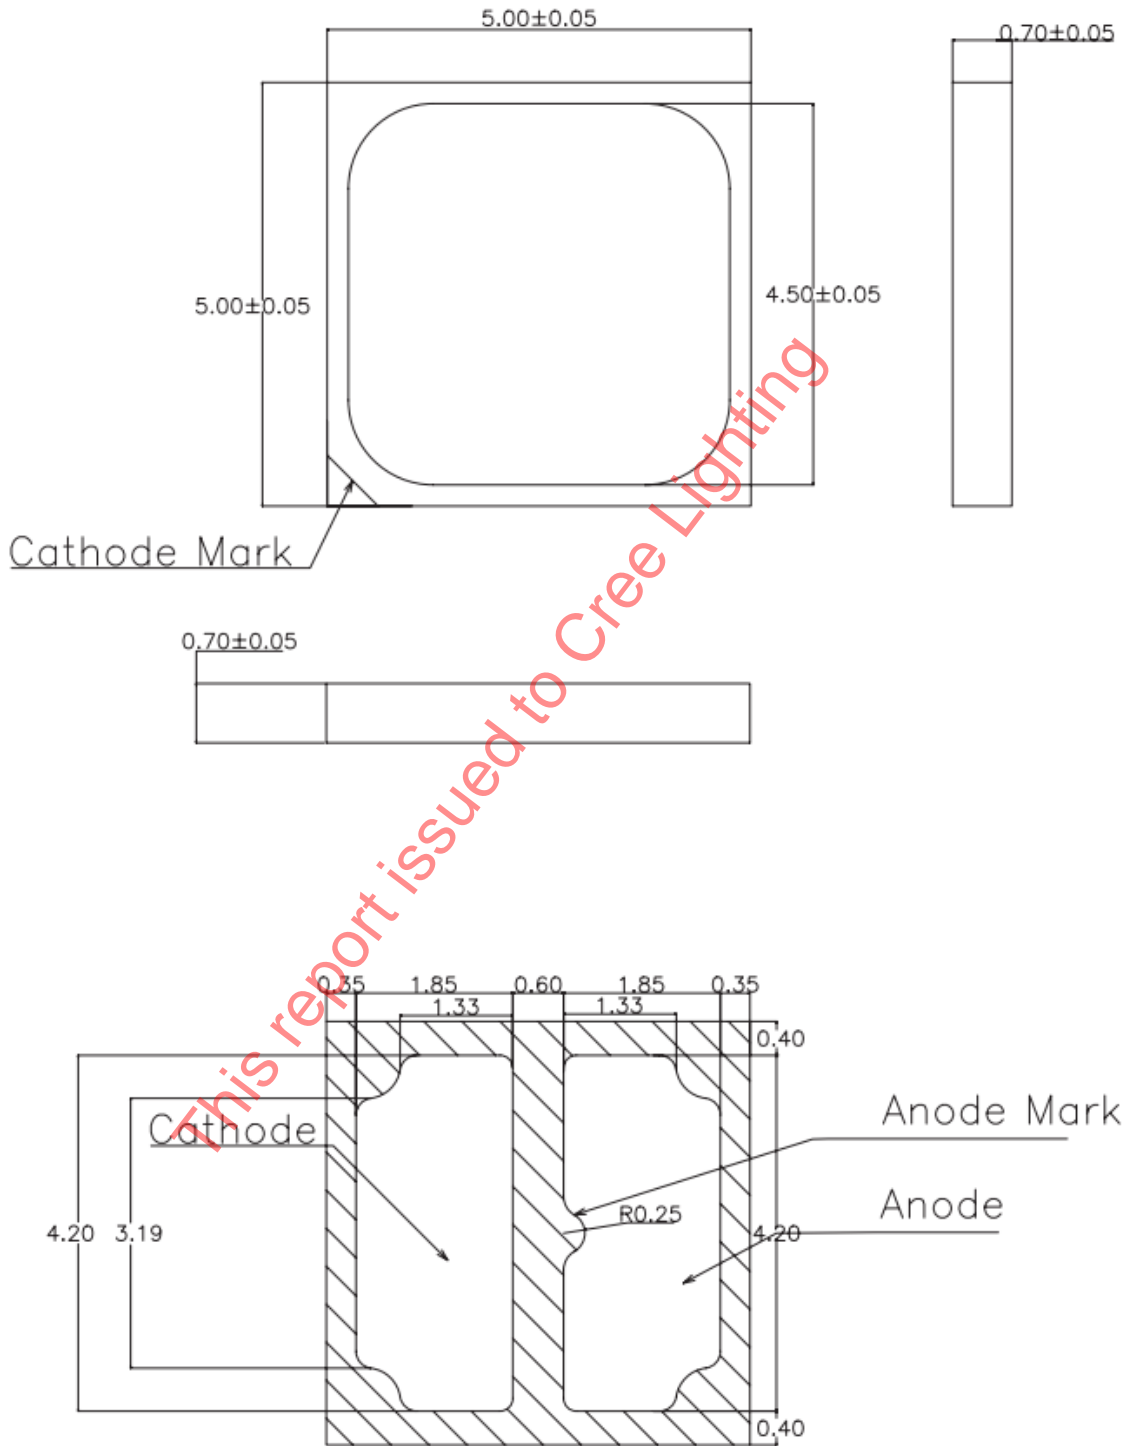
Mechanical drawings for the LUXEON 5050 Square LES (all dimensions in millimeters).
